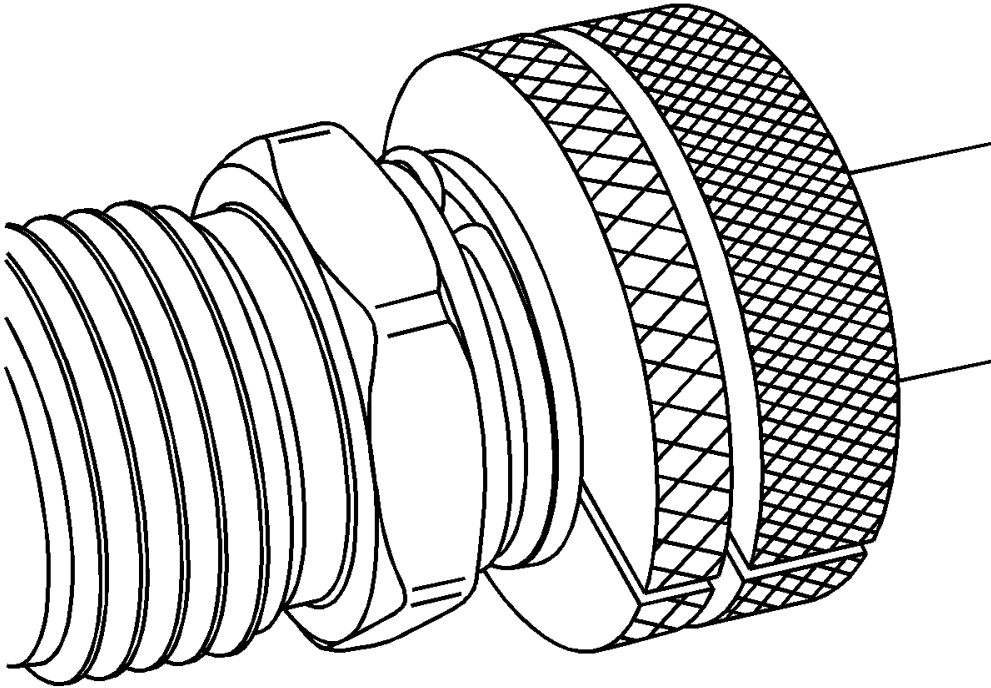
Rotating Quick-Connect On Coolant Pipe
